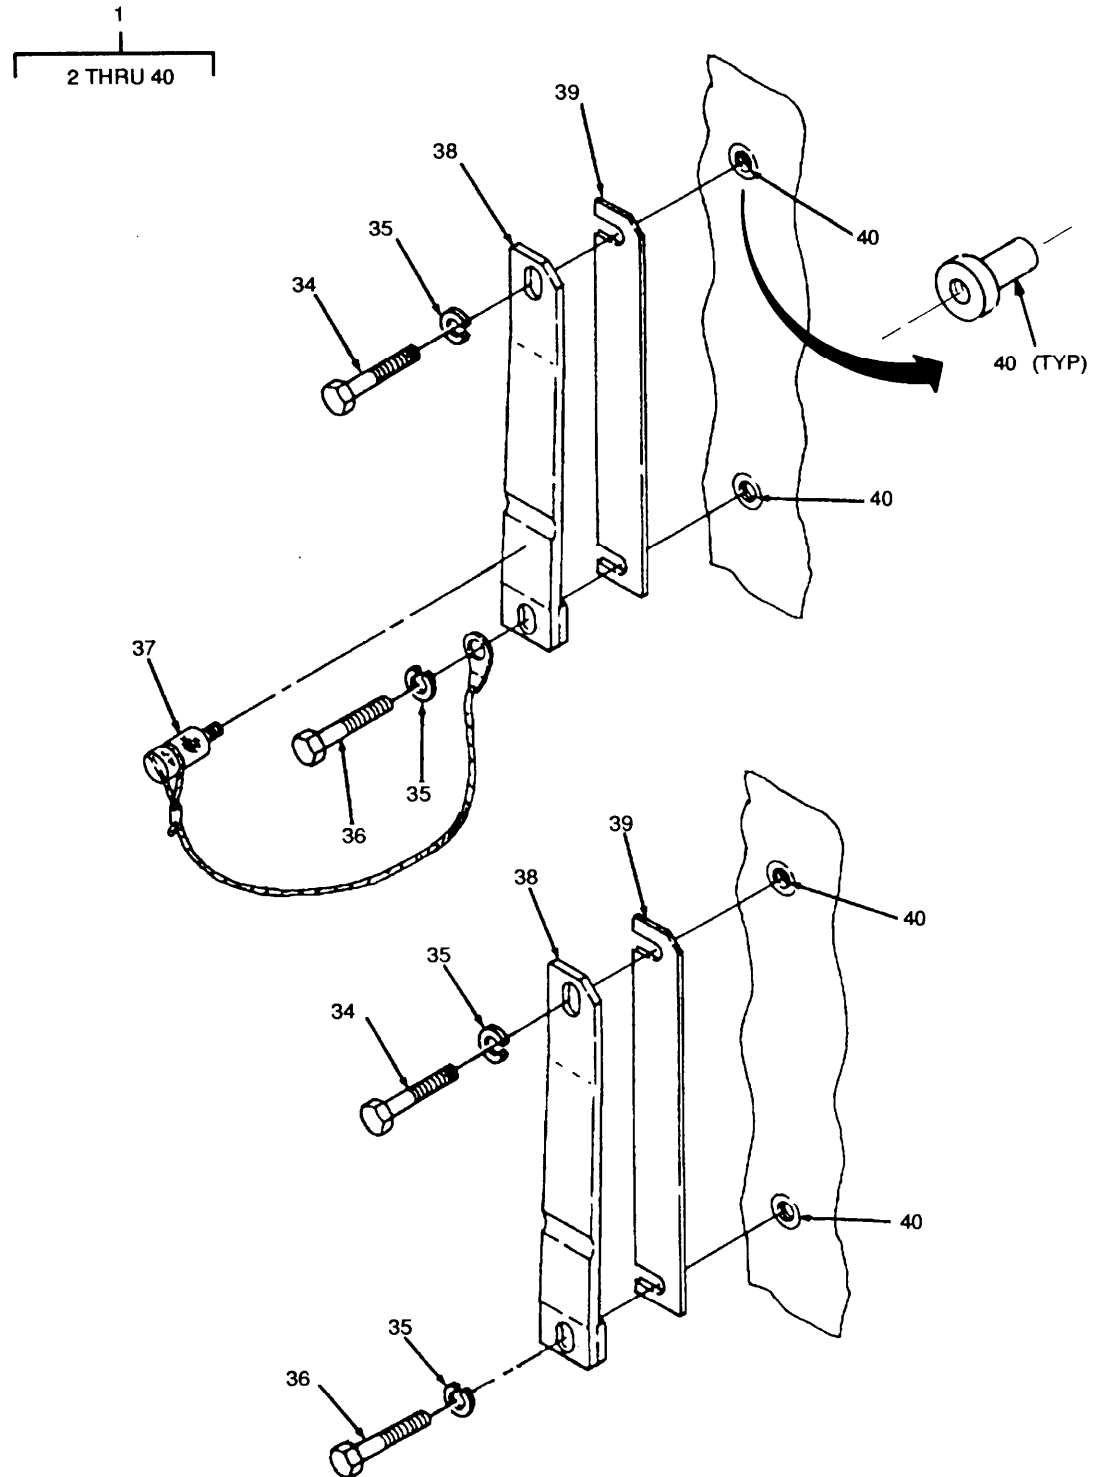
Door Handles, Lock and Latches (Sheet 2 of 3).
